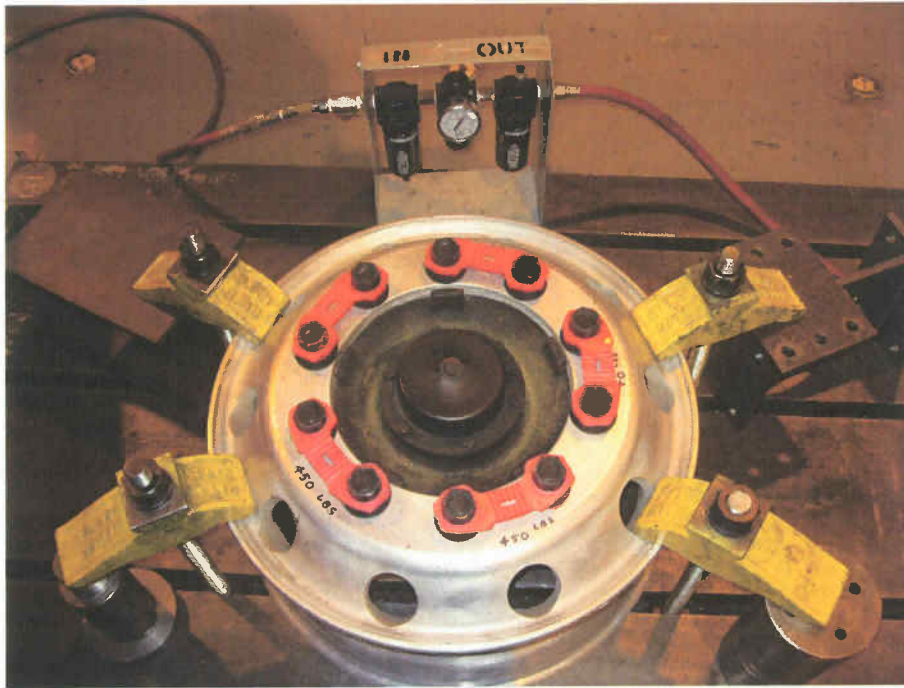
Test set-up – Samples installed on nuts, aluminium drum
